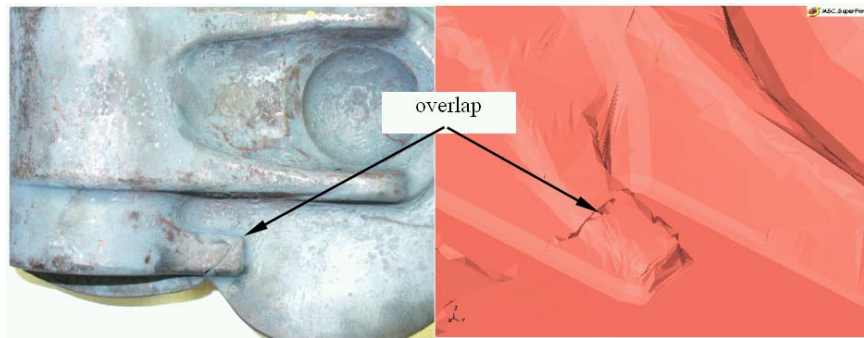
An overlap formed in the forging; real production forging (left side) and numerical modeling of forging (right side) – version II of preform
